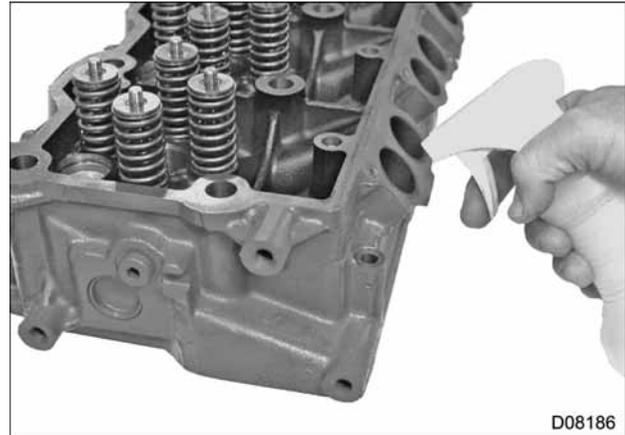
Intake and exhaust ports sprayed with mineral spirits
